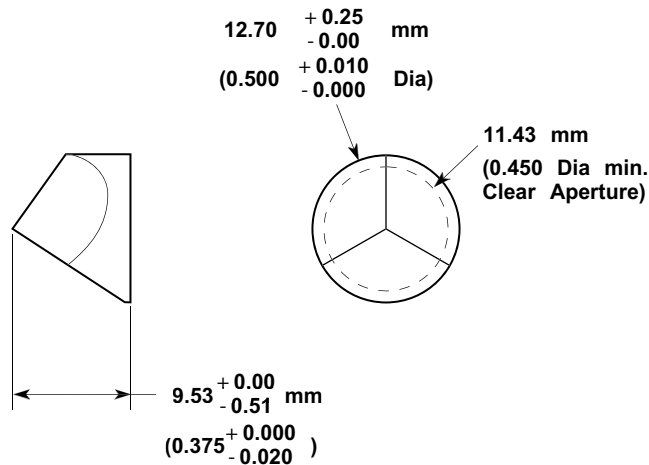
B-5. Agilent 10713C 1/2-Inch Cube Corner, no housing — dimensions
